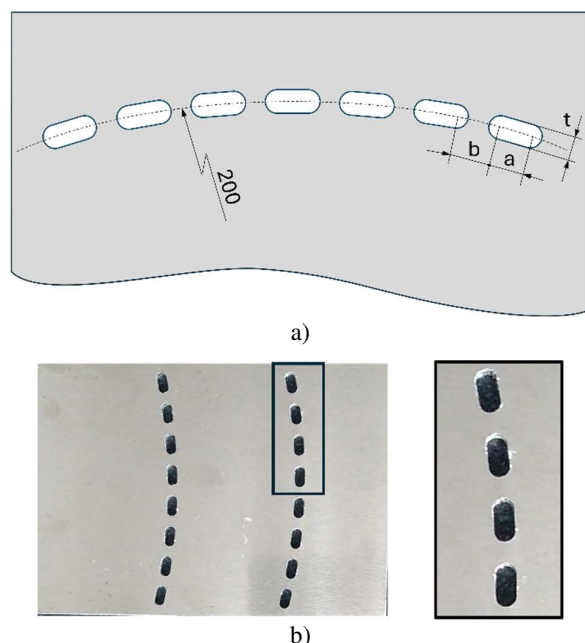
The geometry and dimensions of the slots cut through metal sheet: $a = 4$ mm, $b = 8$ mm and $t = 4$ mm; (a) schematic representation; (b) perforated rectangular blank
